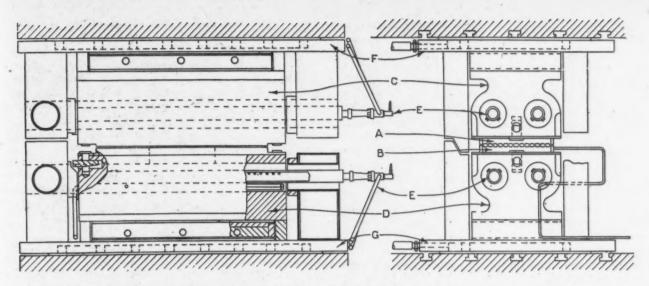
Layout of pressure welding machine as developed in the Junkers factory for production of aftercooler elements.
